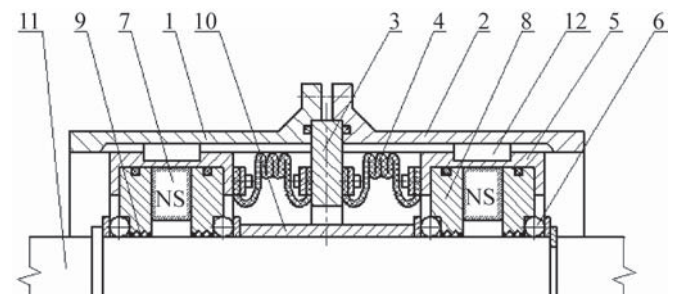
Magnetic fluid seal for a shaft with large axial runout: 1, 2 – casing elements; 3 – flange; 4 – elastic bellows; 5 – carrying sleeve; 6 – rolling element; 7 – permanent magnet; 8 – pole shoe; 9 – magnetic fluid; 10 – distance sleeve; 11 – shaft; 12 – key
